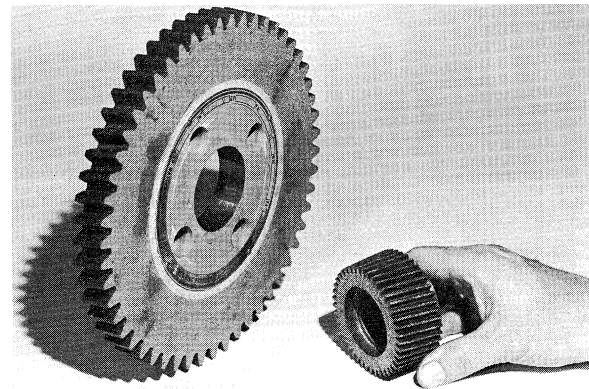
Typical gear honing tools for external gears (left) and internal gears (right).
